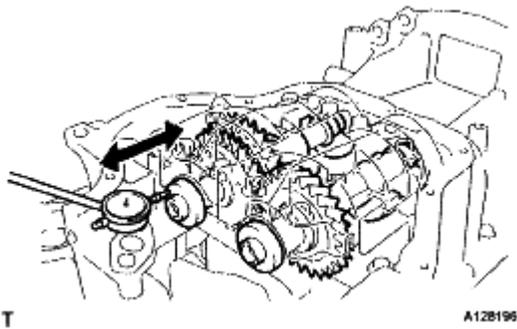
Inspecting Balance Shaft Thrust Clearance
